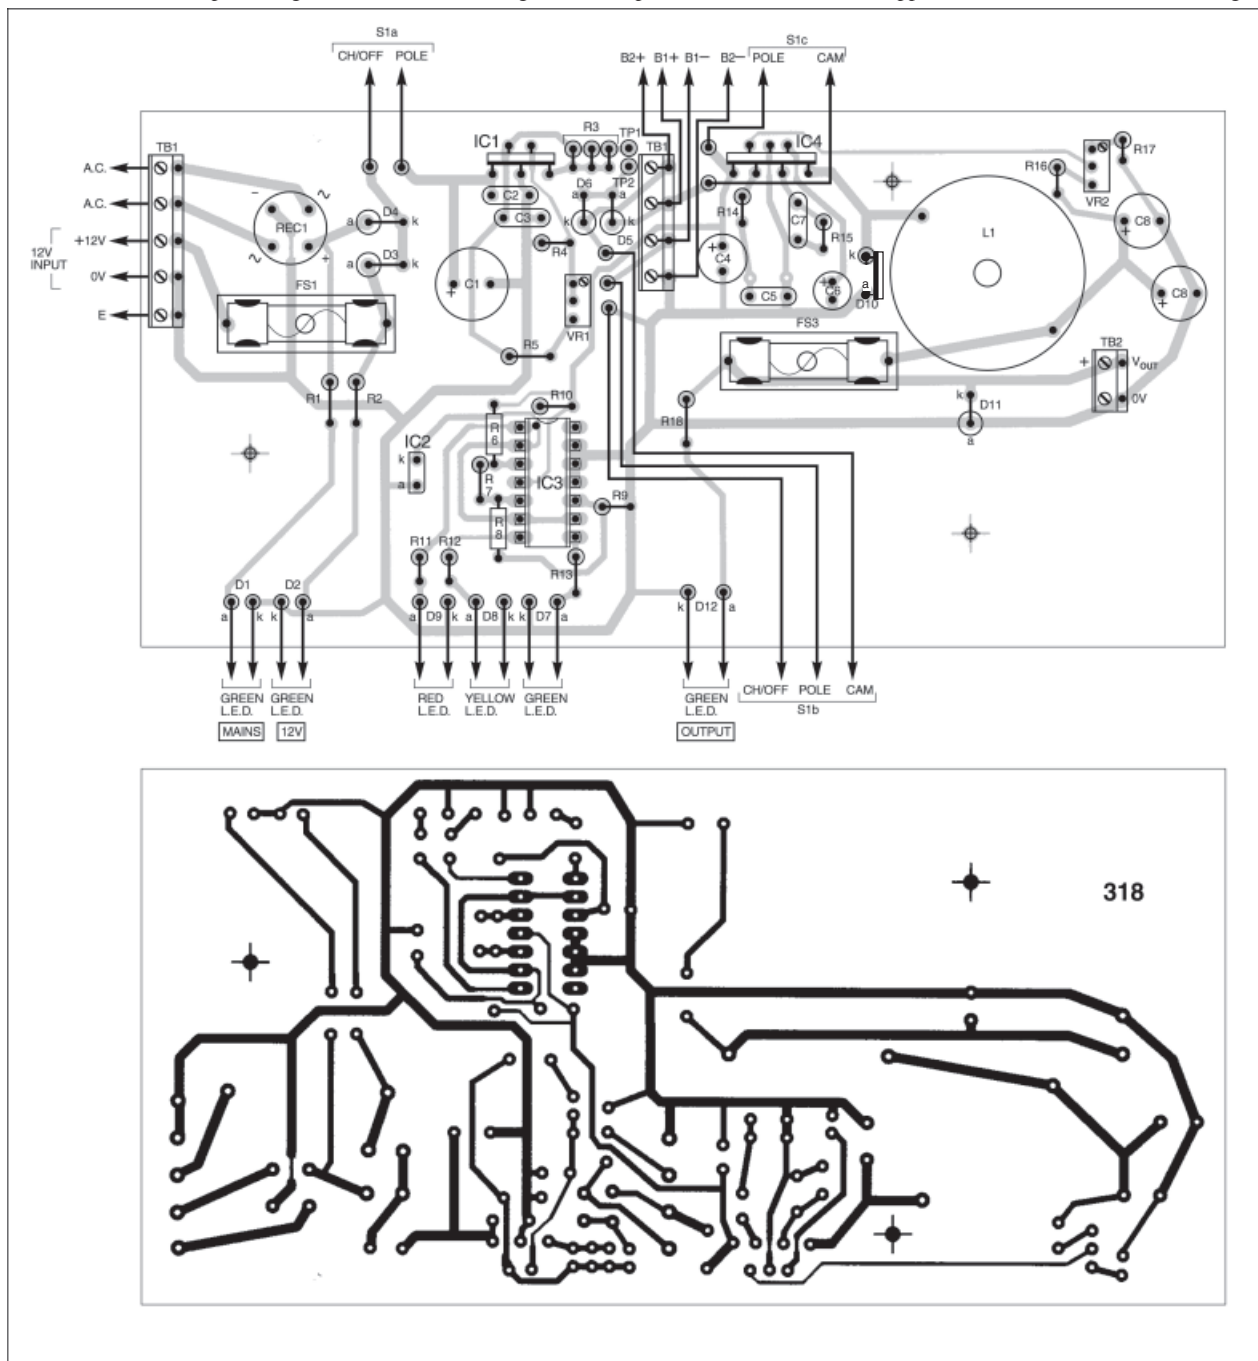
Printed circuit board component layout and full-size copper foil master track pattern for the Camcorder Power Supply.
